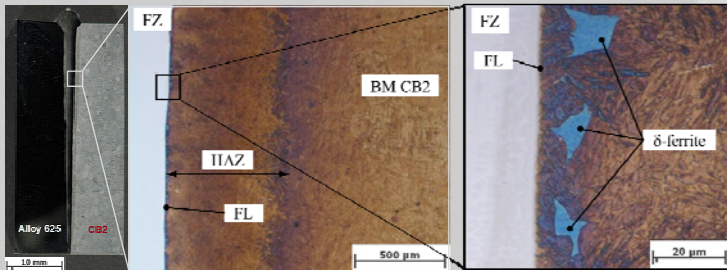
Weld Seam; HAZ and FL on the CB2 side of the EBW samples.
